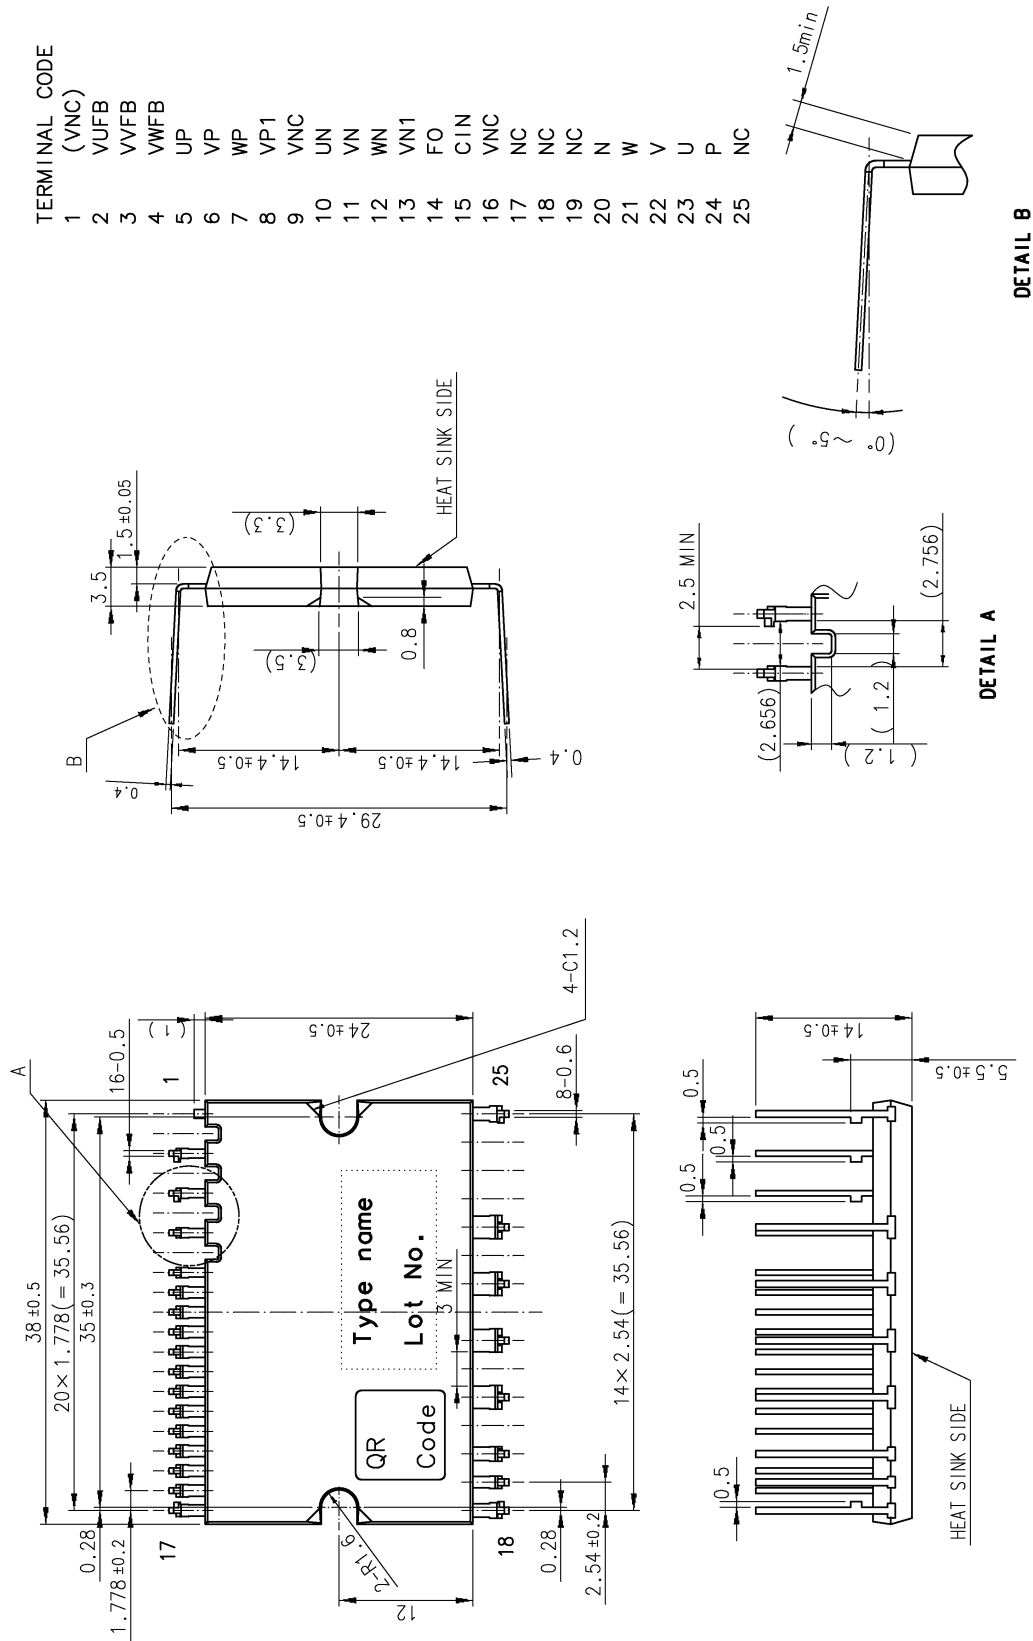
Long pin type package(-4A/-AT) outline drawing
